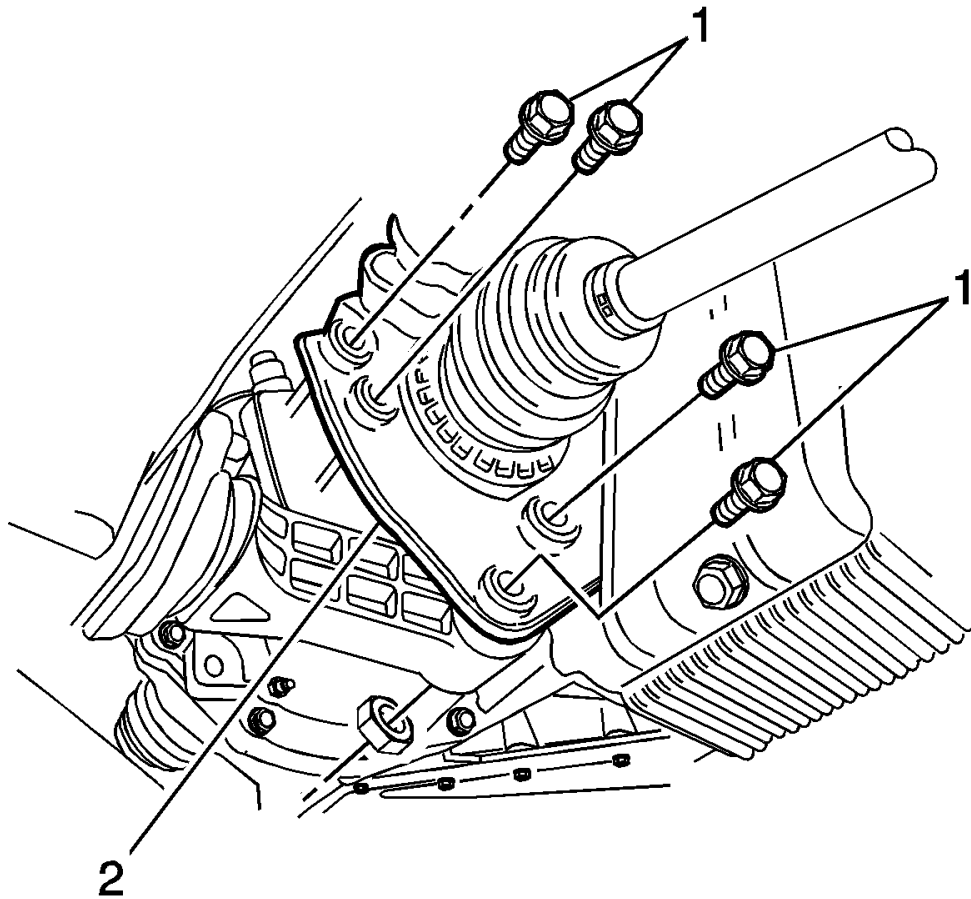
Transmission Rear Mounting Bracket (A/T)
